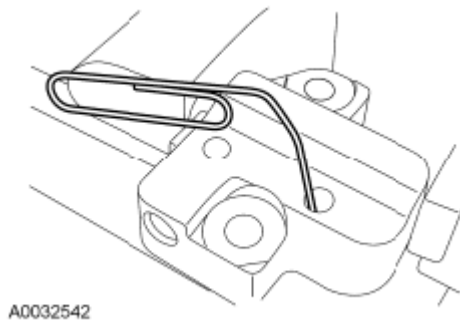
Installing Paper Clip Into Hole In Tensioner Housing
